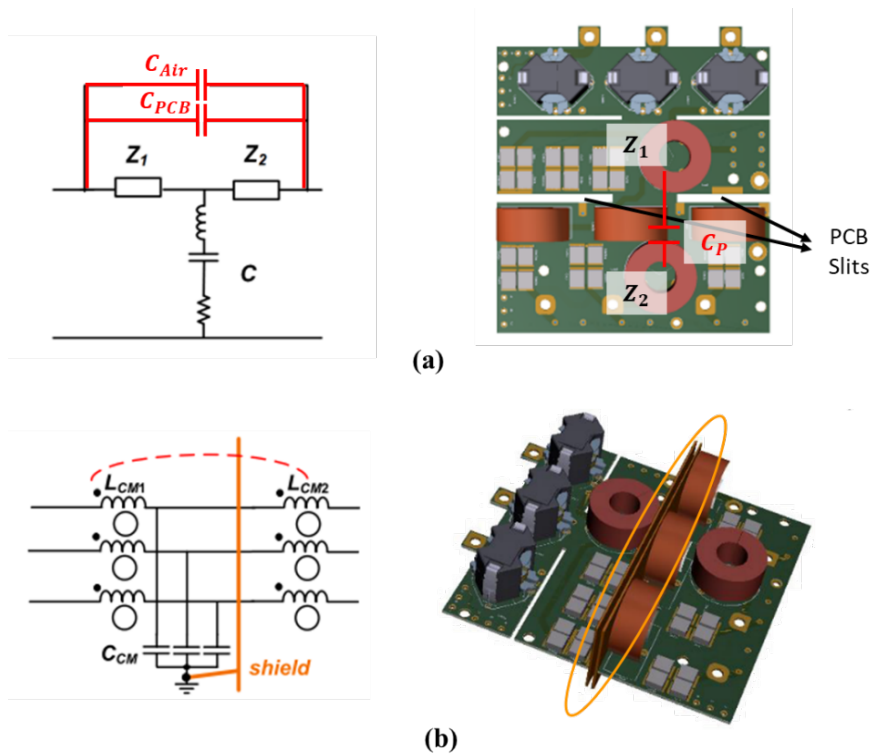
Electric coupling cancellation scheme (a) Create PCB slits (b) Insert electric shield
